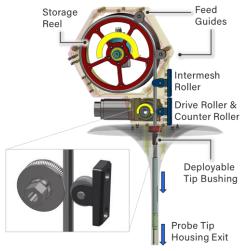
LISTER Mechanism cutaway view, showing deployment schematic
